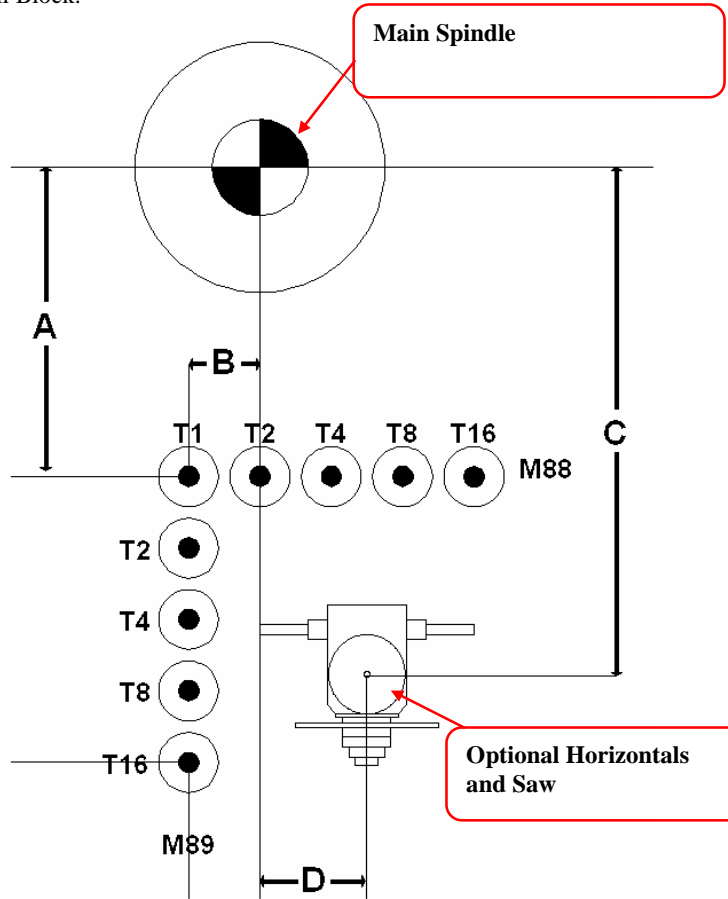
(see Table Below) Work Offsets must be put in Table to swap primary position of the axis. Your Multidrill postprocessor will select the M code and T codes, however you can test drill block by going to MDI mode and dropping selected drill. Example M88T1 drops corner drill.
